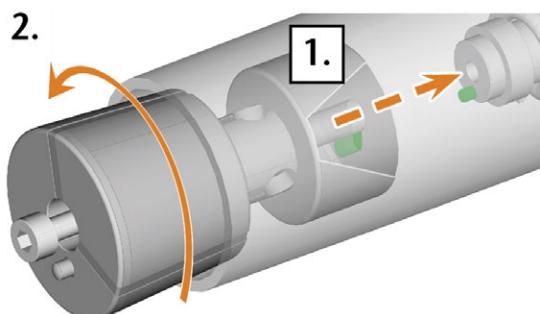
INSERTING THE COLLET CHUCK INTO THE BLANK HOLDER
